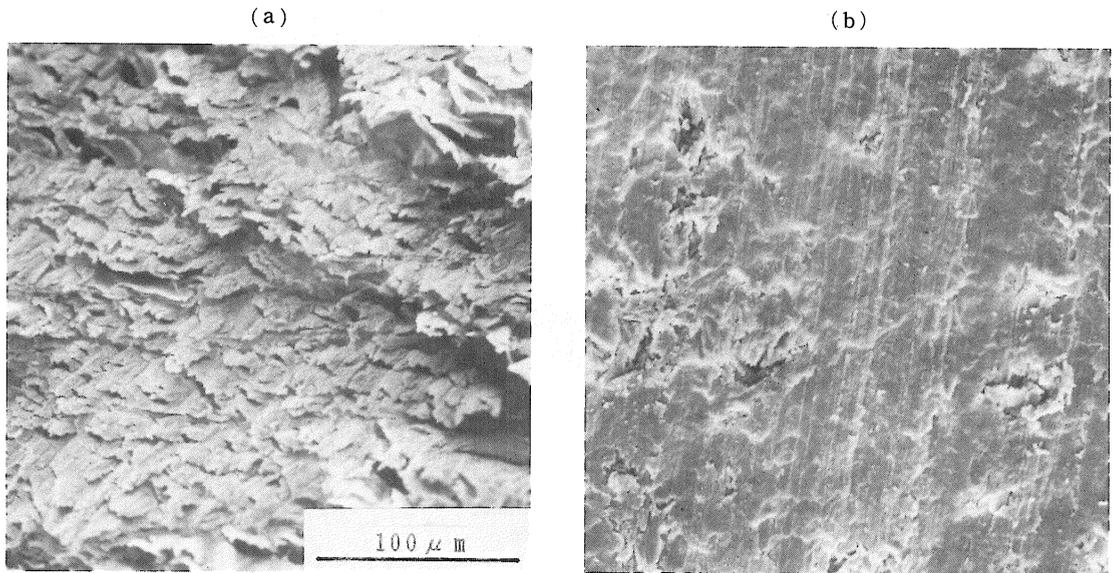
Surfaces at each machined step of cross section in peripheral turning.
